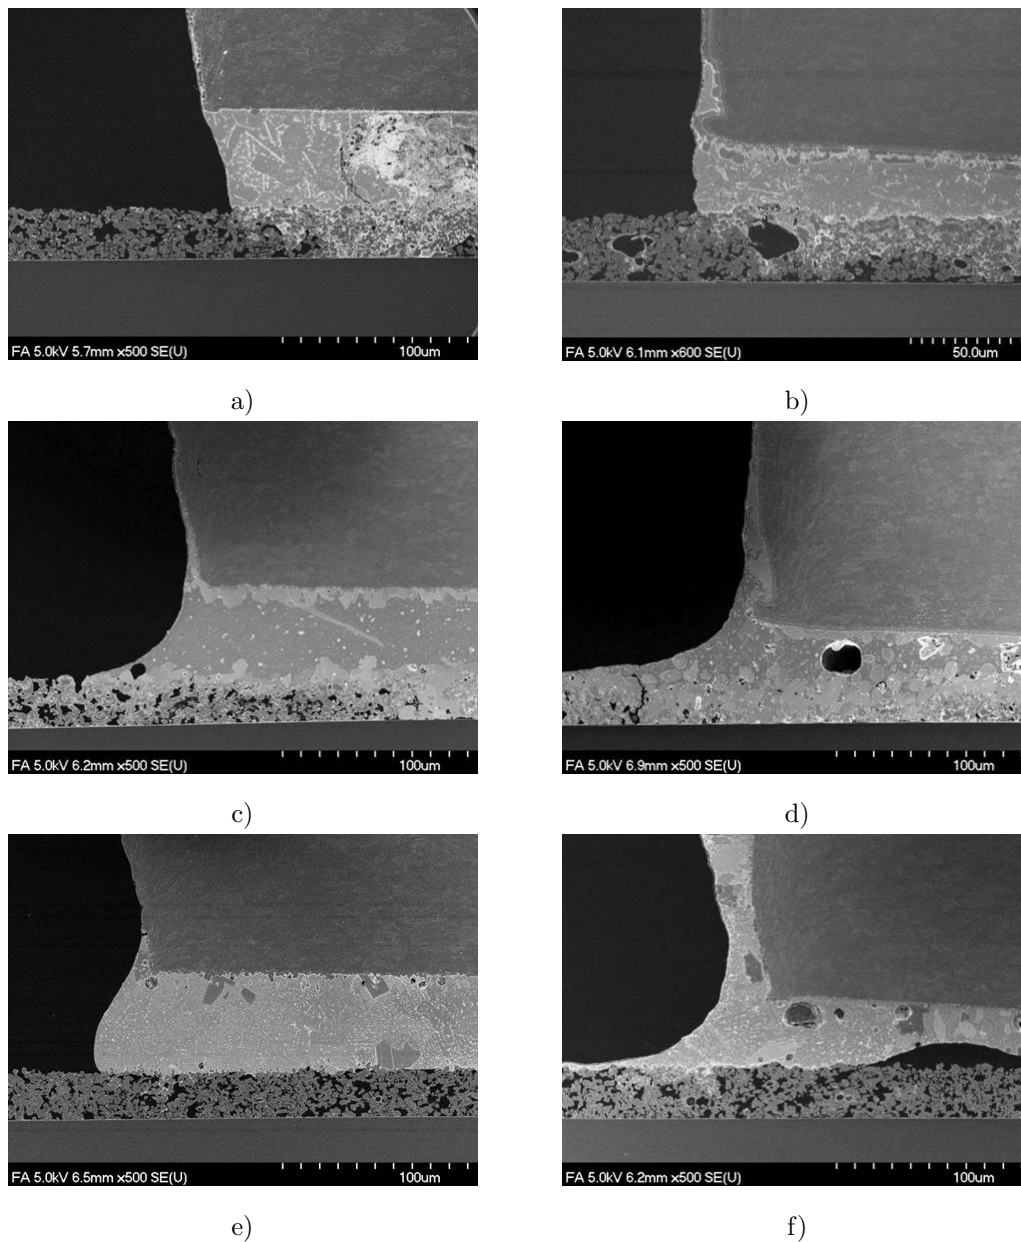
Cross-section view on soldered CP-003 samples in the positions specified in figure 3.39.
